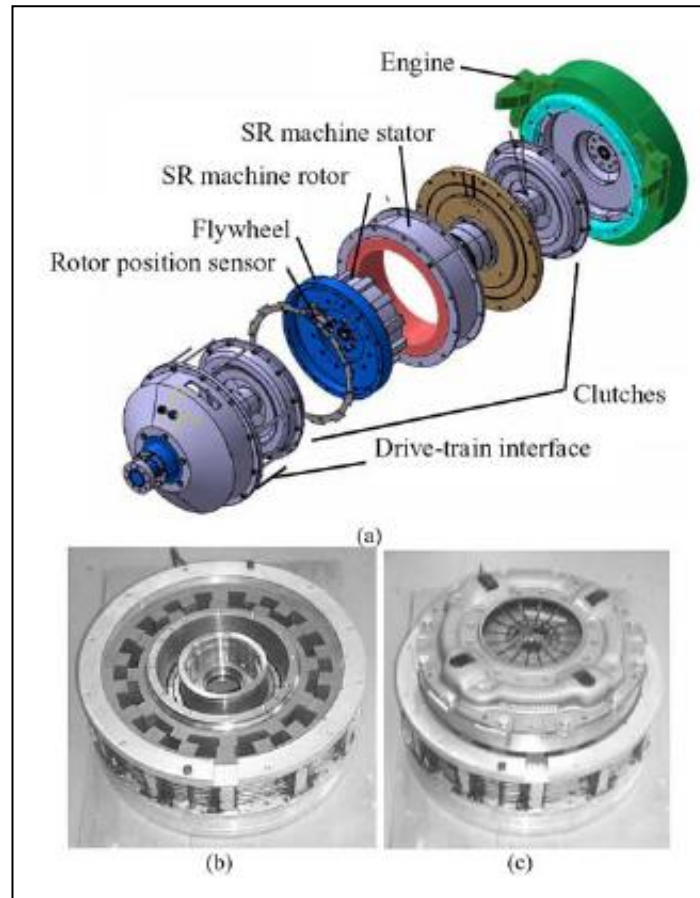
SRM with Integrated Flywheel and Clutch For HEVs: (a) the Machine's Schematic, (b) the Rotor/Stator Without Windings; and (c) the Assembled Unit [68].
